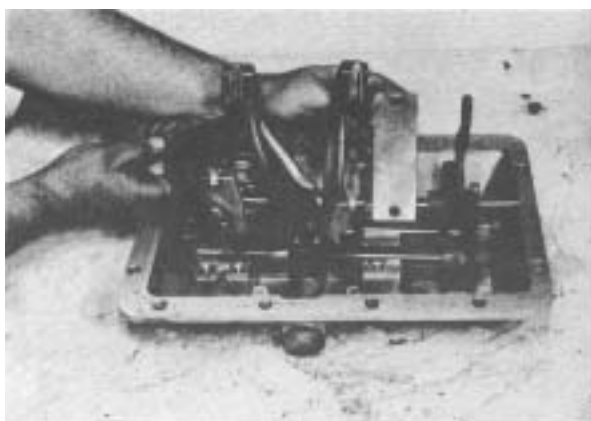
Position front rail support shift rails and install cap screws. Position rear support over rails and install cap screws.
